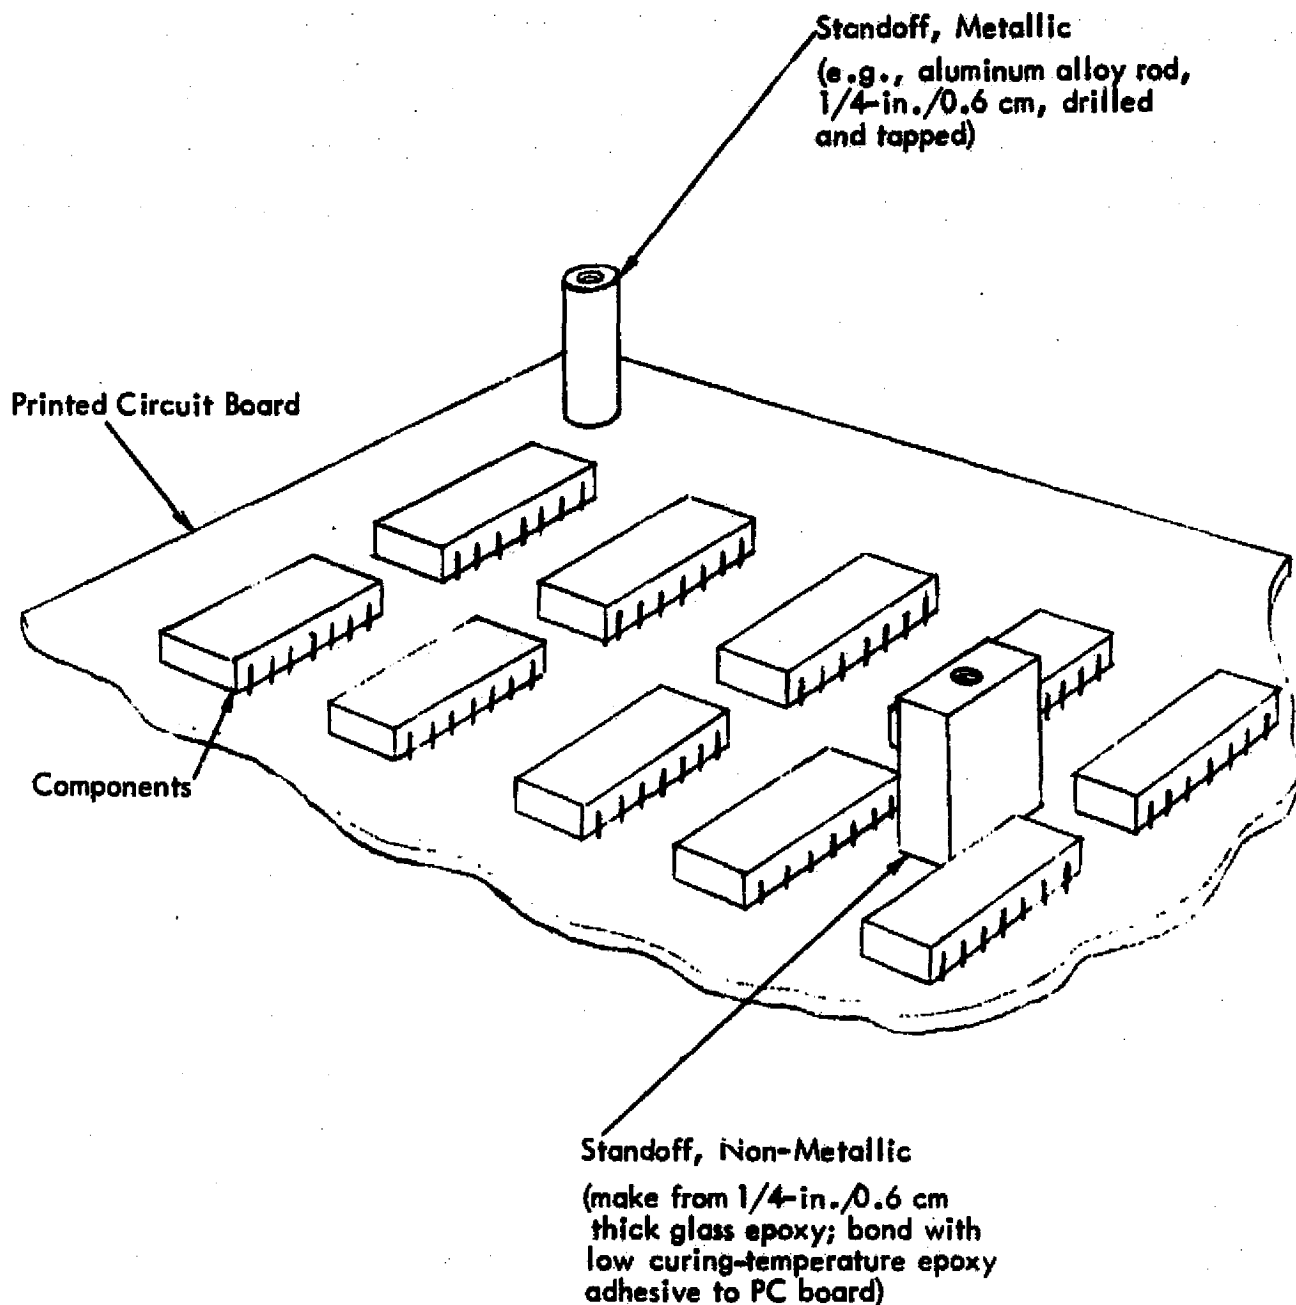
Mechanical Securing - Printed Circuit Boards
